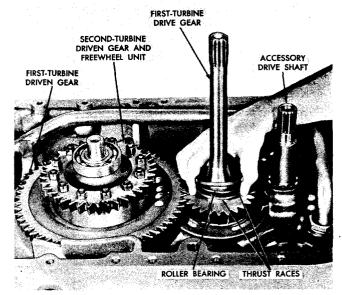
Installing thrust race and bearing on firstturbine drive gear
